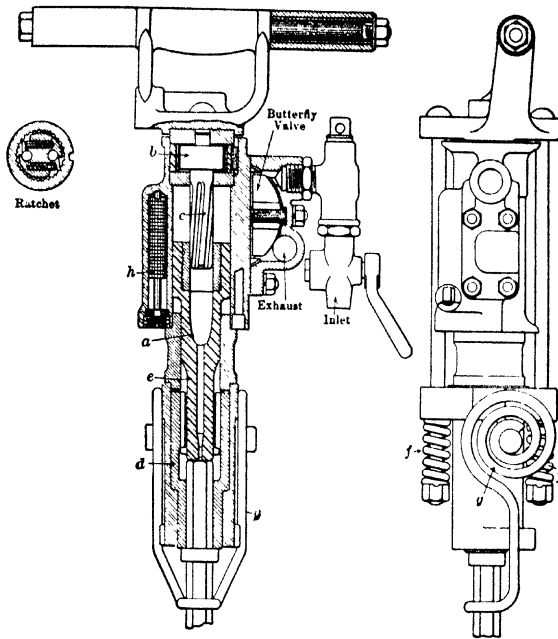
Ingersoll-Rand "Jackhammer" Hand Drill, "BCR-430," for Dry Holes.
